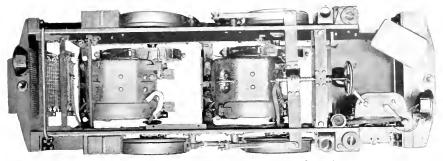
Top View of the Equipment of an Inside Frame Mine Locomotive
